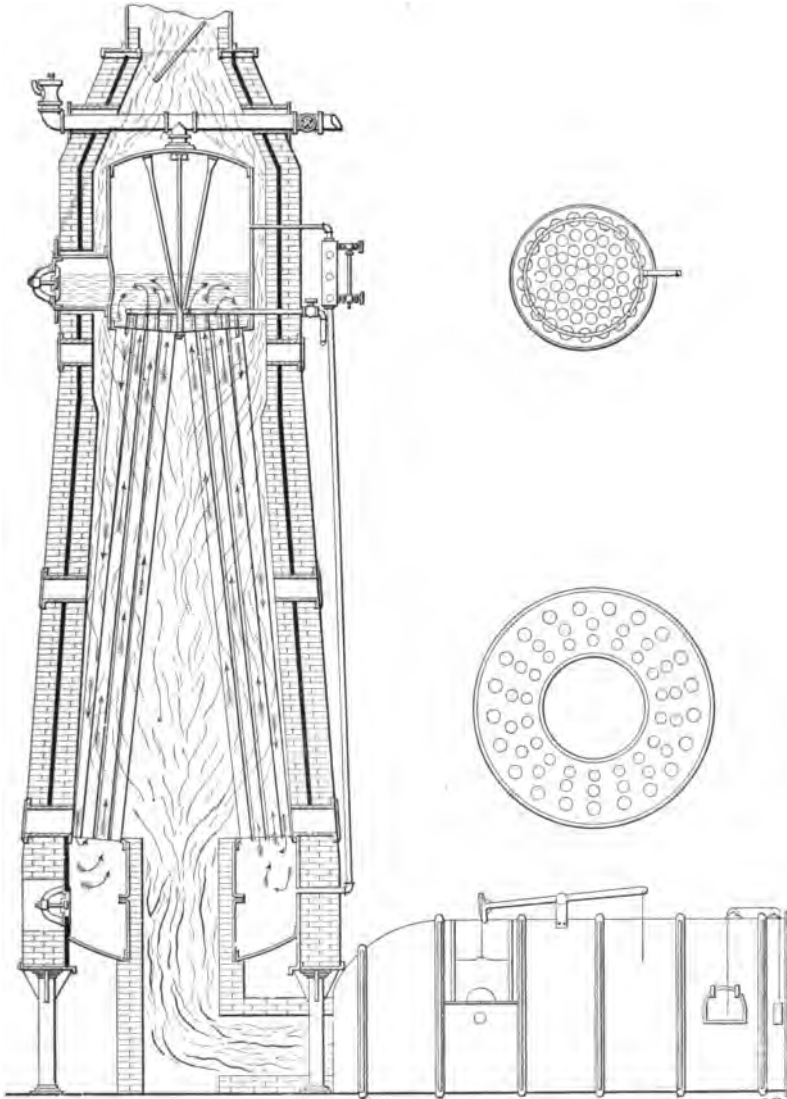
SECTIONS OF THE CAHALL WATER TUBE BOILER.
